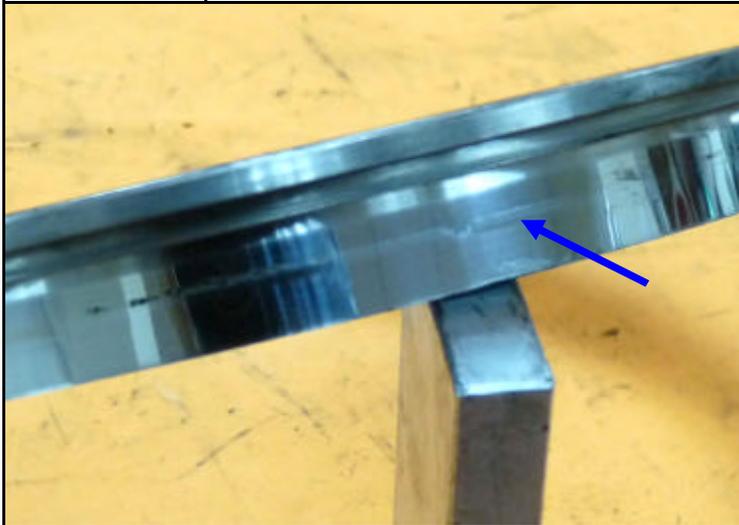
shows a close up of faint contact marking is visible on the polished surface of the outboard primary ring. An attempt made to remove the marking by polishing was not successful without affecting the tolerance. This component requires replacing.
